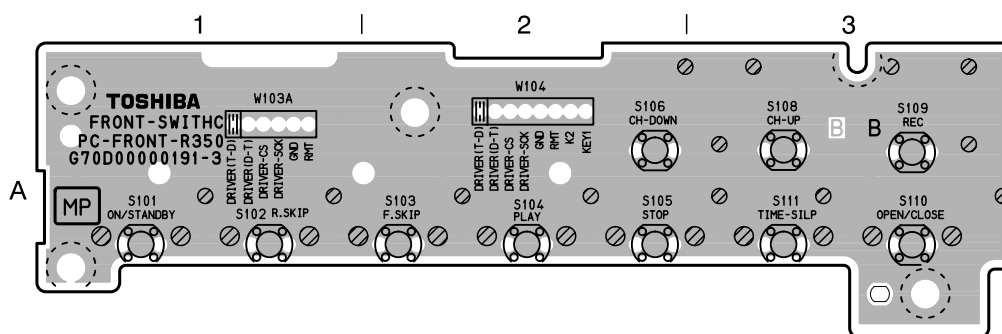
EU03B Front (L) PC Broad (Top side)
